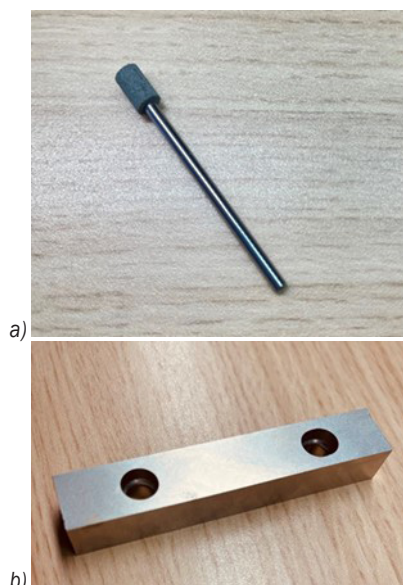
a) Diamond grinding tool, and b) cemented carbide workpiece
